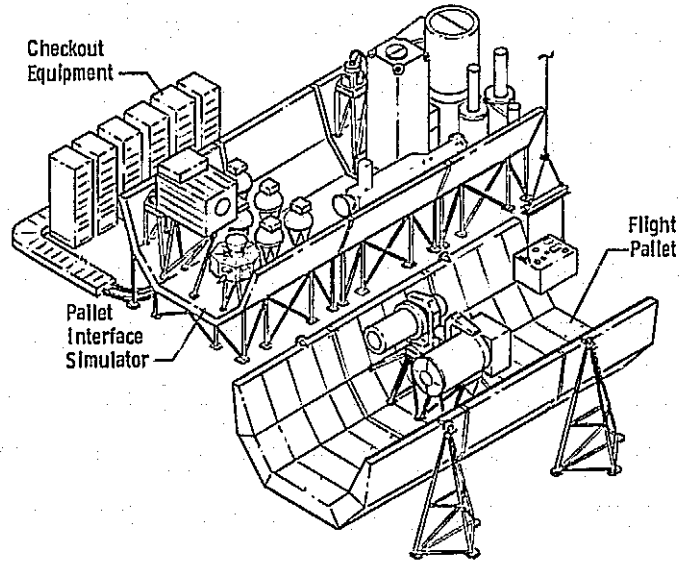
Pallet Interface Simulator - Labcraft Assembly
